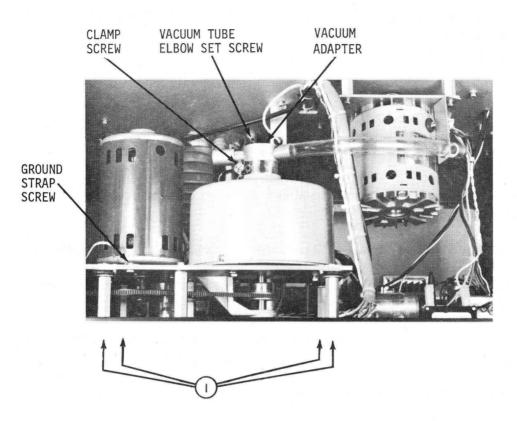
Removal of Vacuum Pump Motor Assembly
